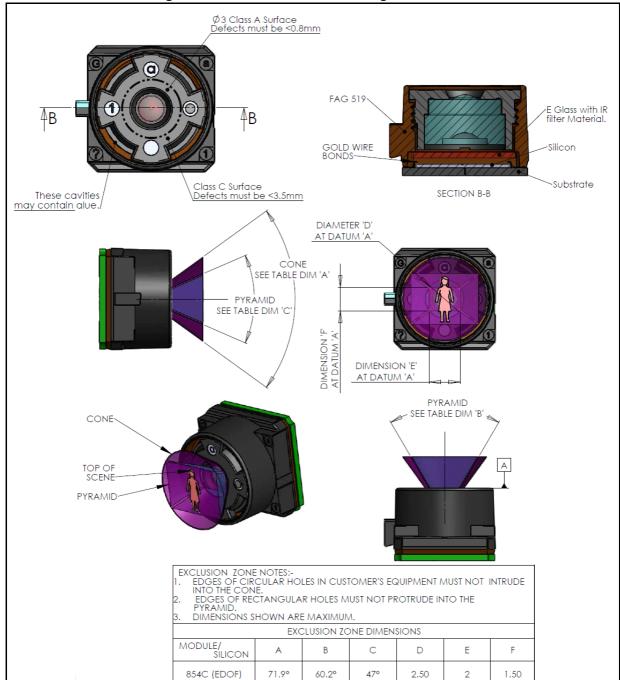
VX6854LC outline drawing - sheet 2 of 3
